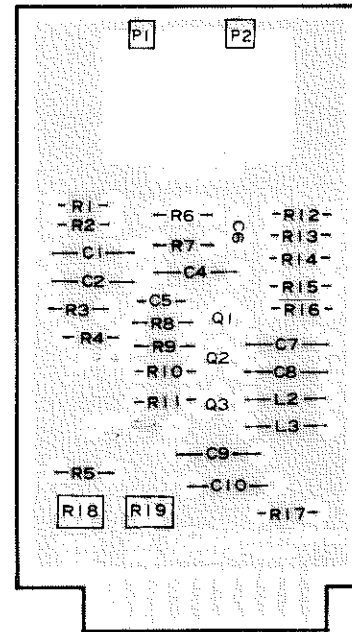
A10 Ref Channel Sampler/A11 Test Channel Sampler Board Assembly Component Locations.
